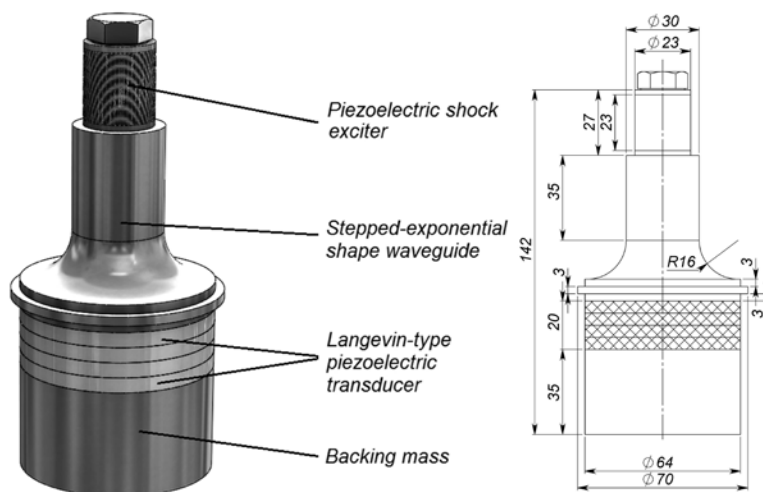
3D model view and drawing of fabricated burst type signal generator
